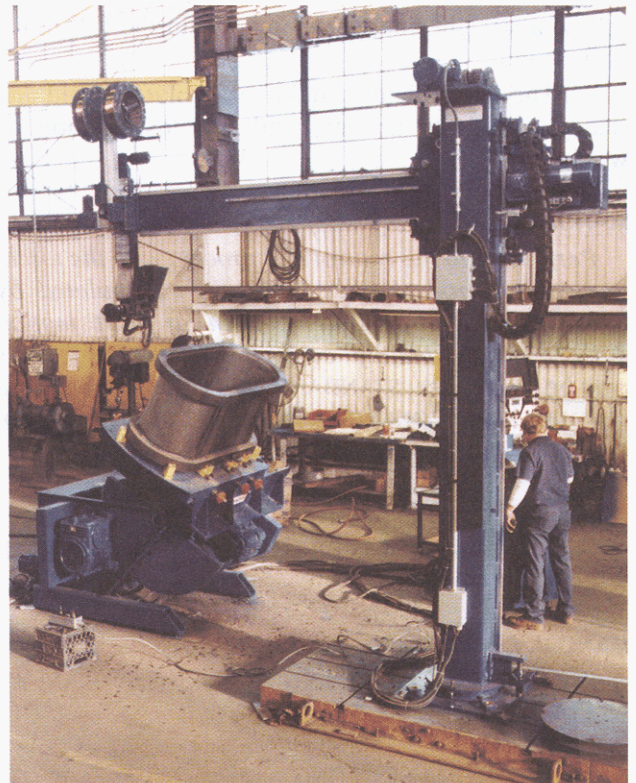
A Submerged Arc Welding Head Shown Mounted on a Manipulator
